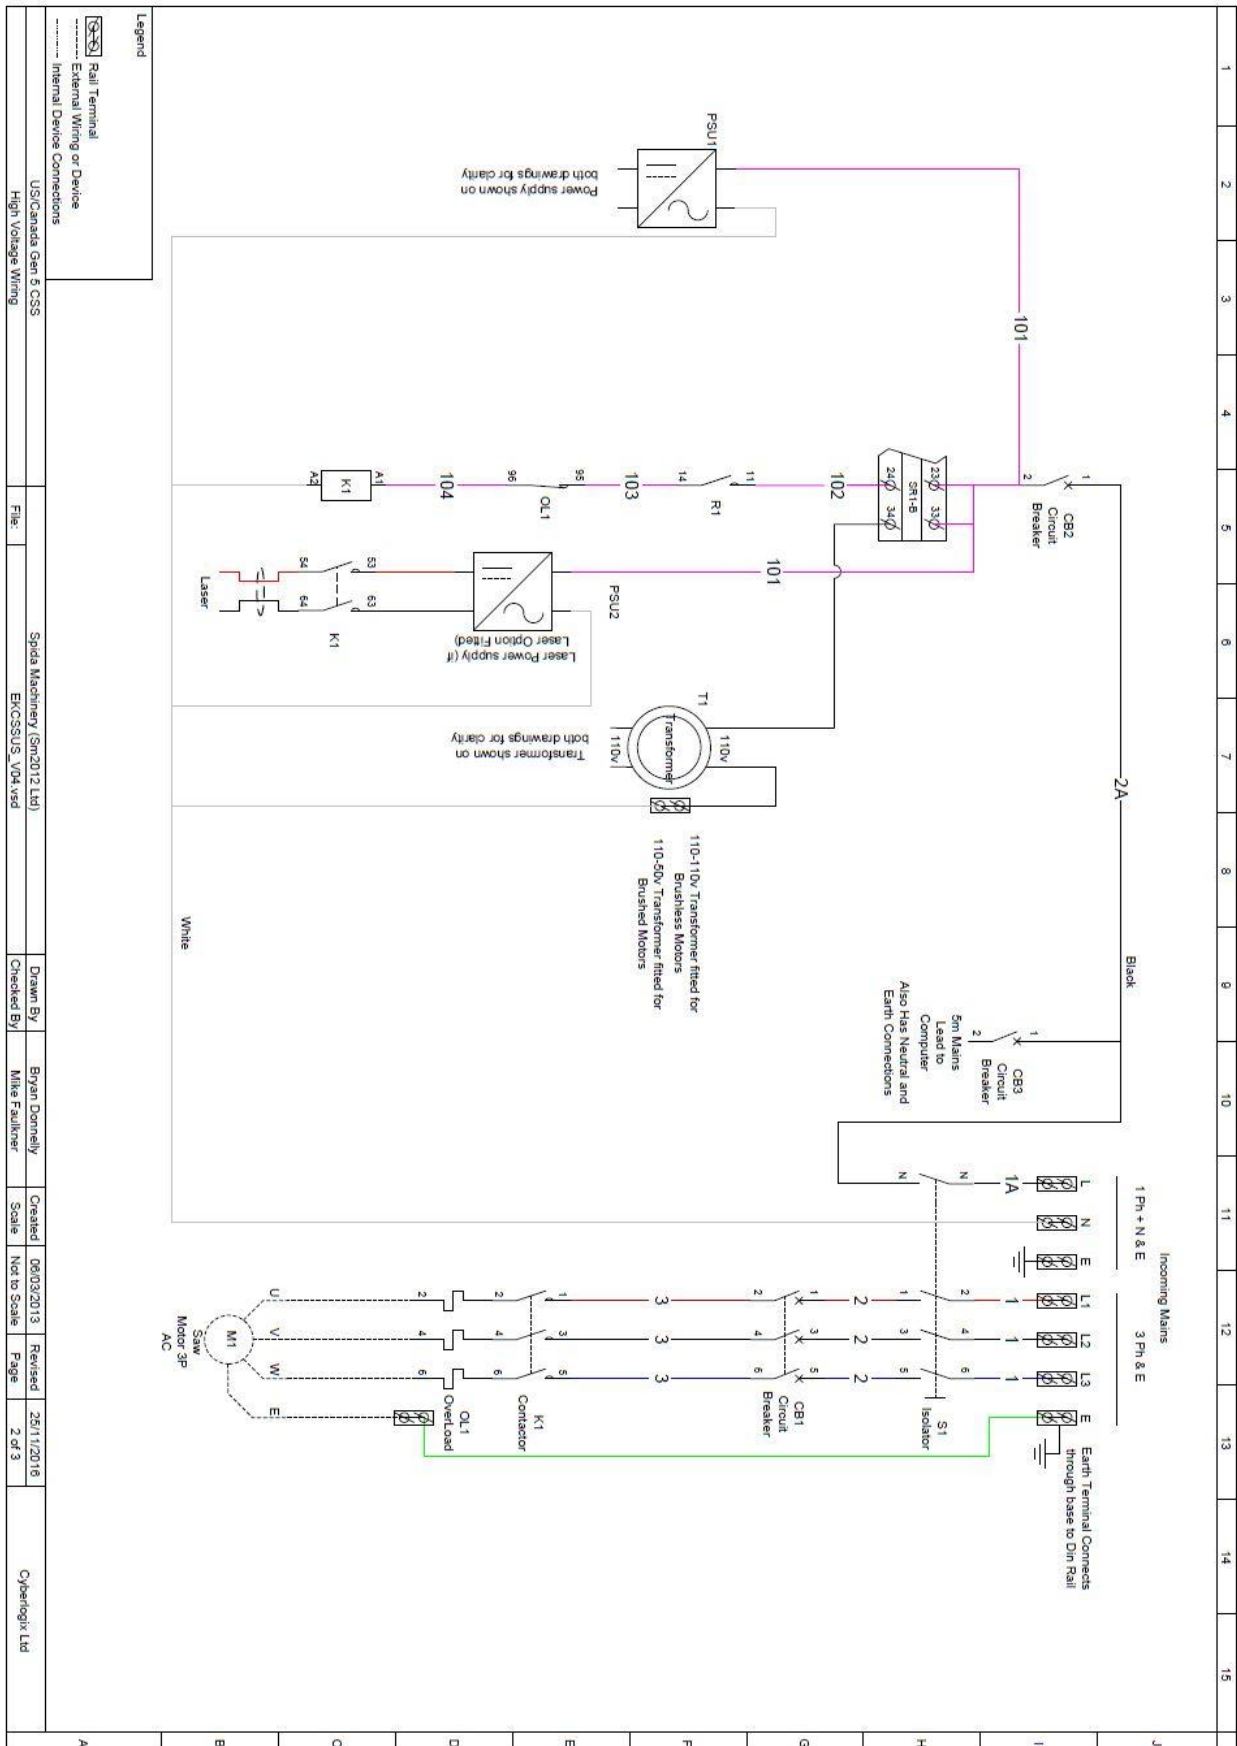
, CSS Vector Saw Electrical Drawings US part 2
